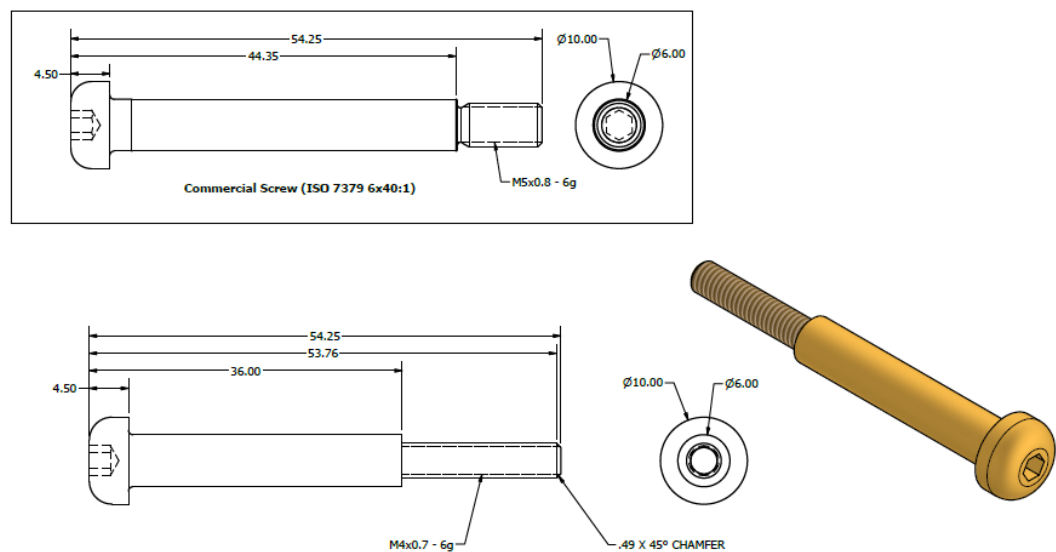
Optimized Design of the Al Casings' Bolt.
